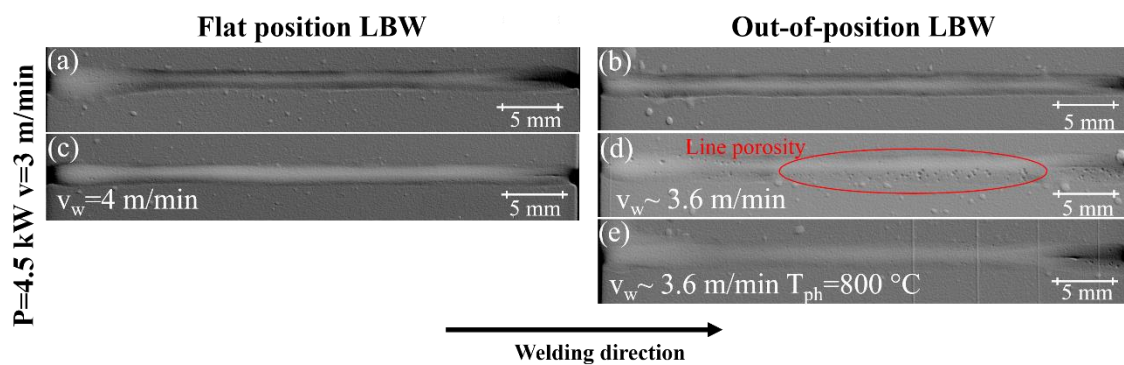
Radiography images of similar Ti6242 joints welded in different welding positions, with or without filler wire and preheated.
